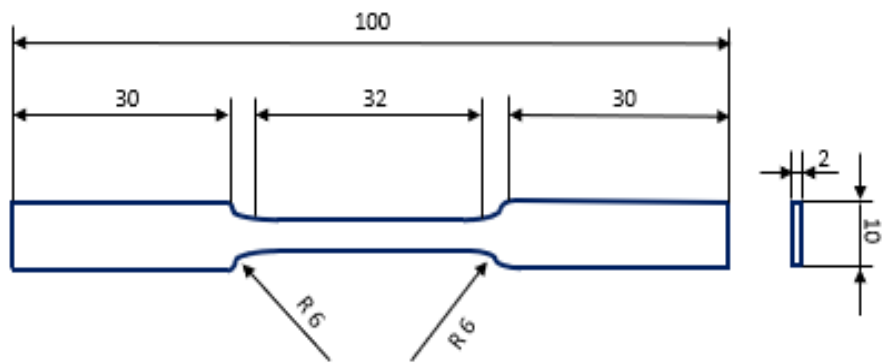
Test Specimen dimensions according to ASTM E8/E8M-16A
